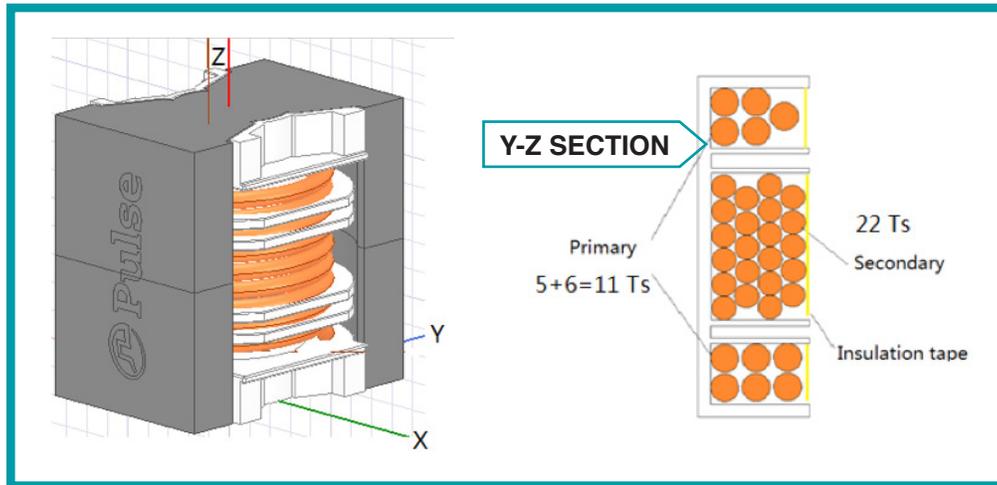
Winding cross section for tight tolerance leakage inductance
